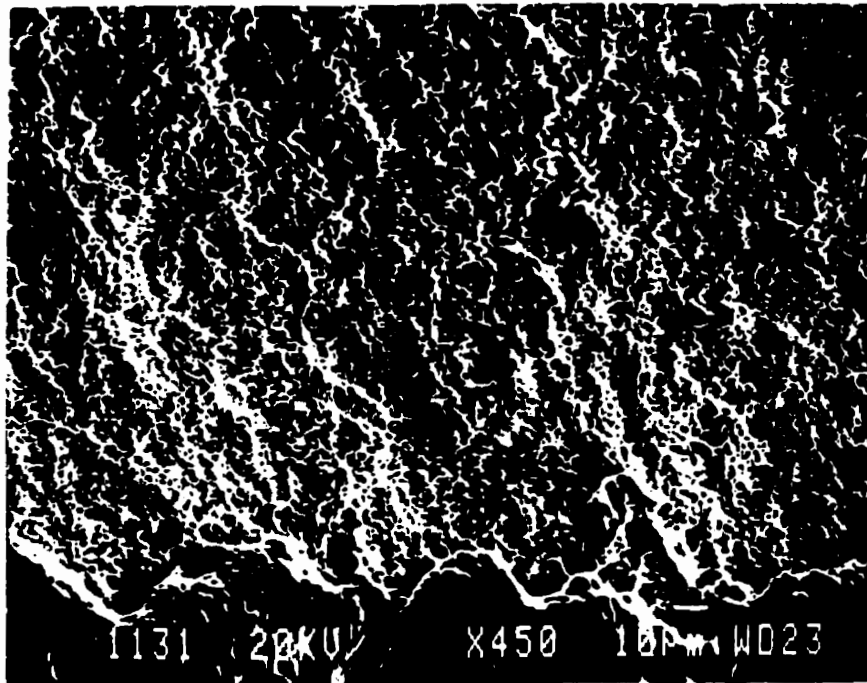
Fracture Surface of Sample C Tested at 852 s^{-1}
